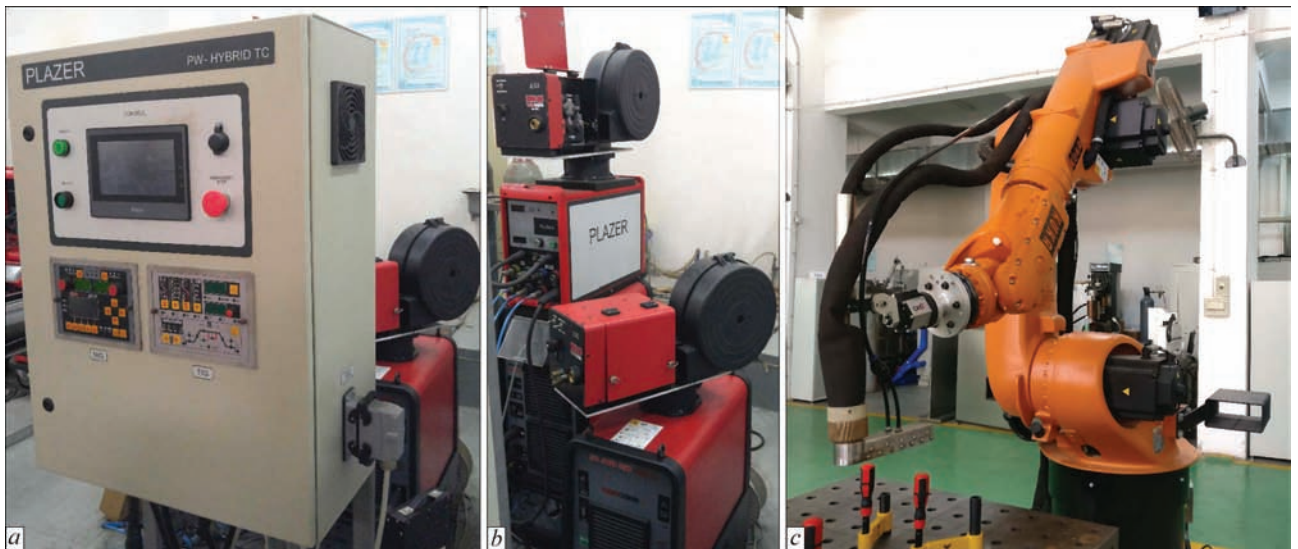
Equipment of the complex for robotic hybrid Plasma-MIG welding: *a* — control panel of the complex for hybrid Plasma-MIG welding; *b* — power sources for plasma and arc components with wire feed mechanisms; *c* — welding torch in the arm of KR 60 HA robot of KUKA Company (Germany)
